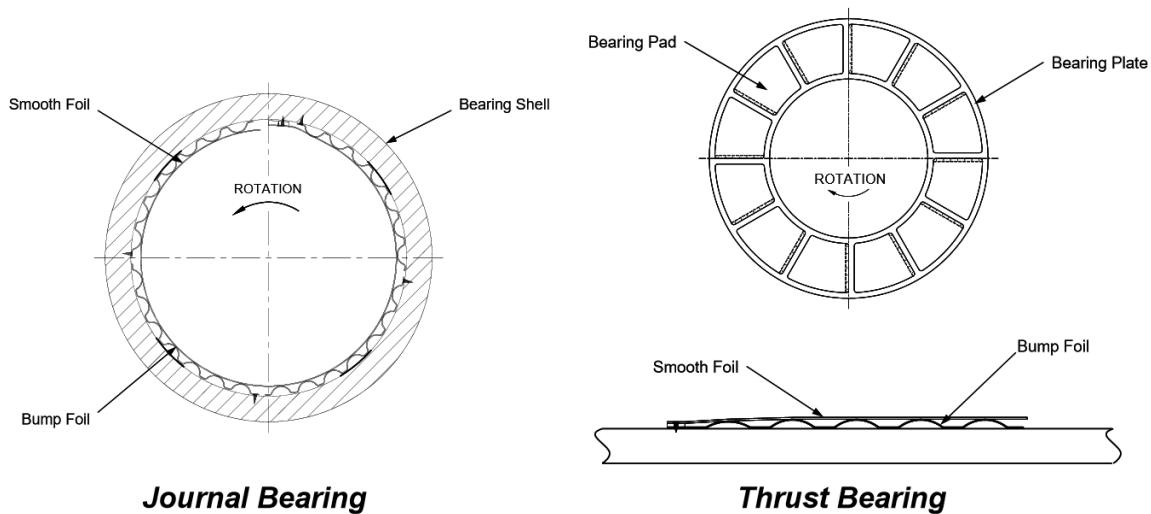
Typical construction for bump foil journal and thrust bearings [3]
